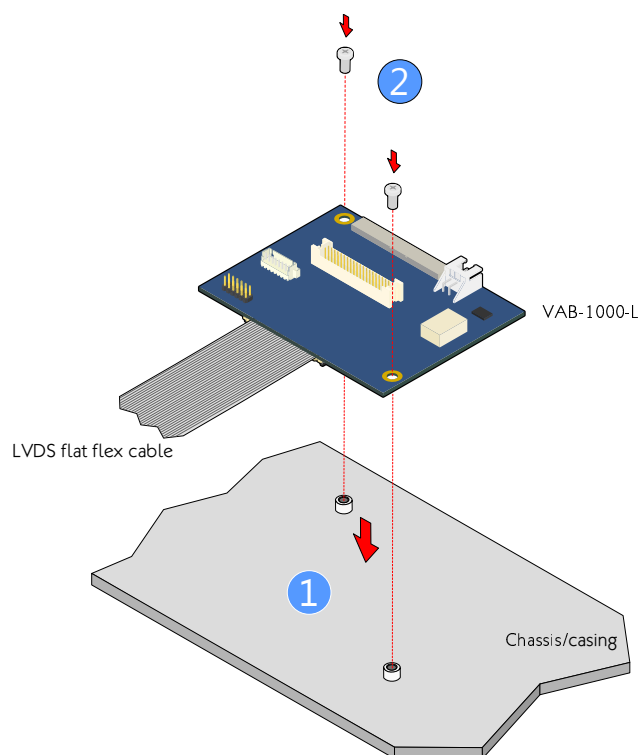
Installing the VAB-1000-L LVDS converter card on the chassis
